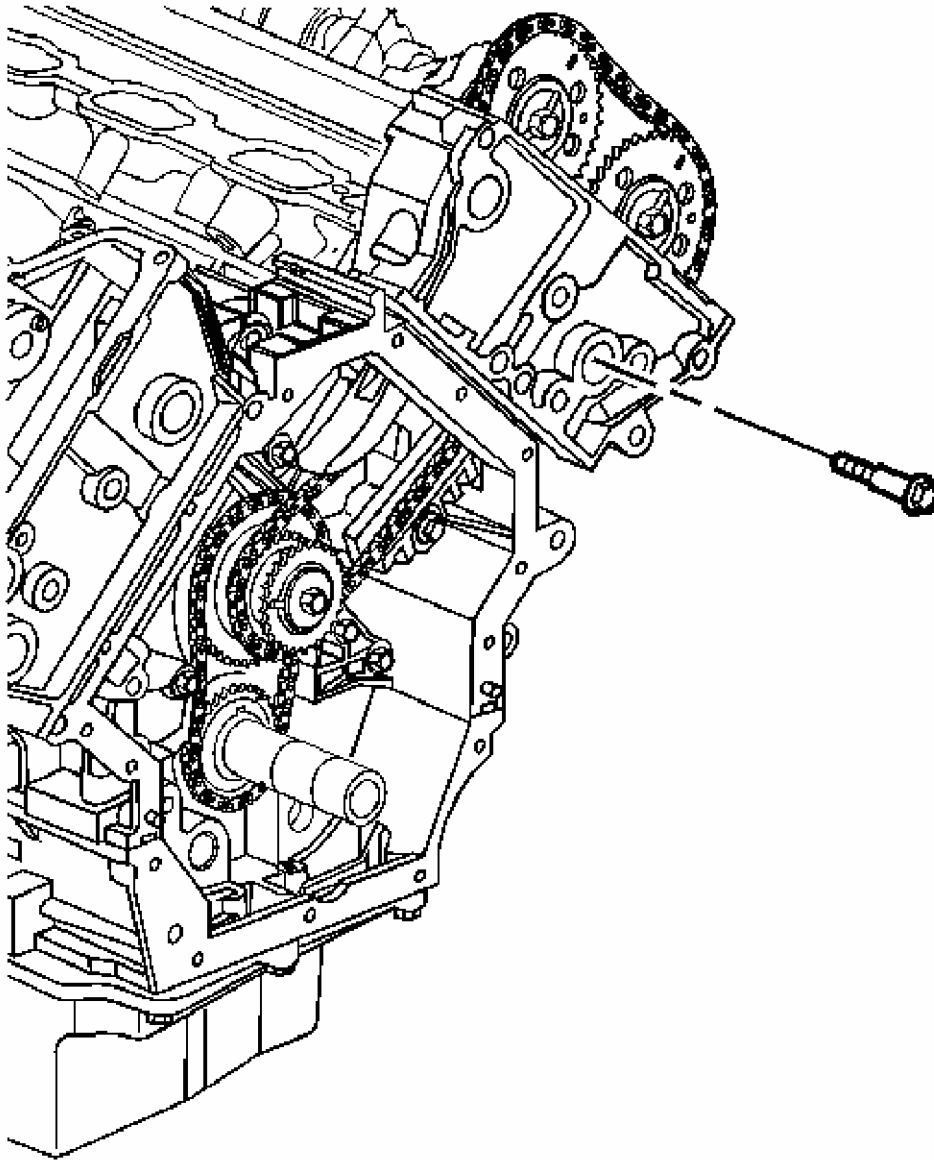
Identifying Upper Left Secondary Camshaft Drive Chain Guide Bolt
